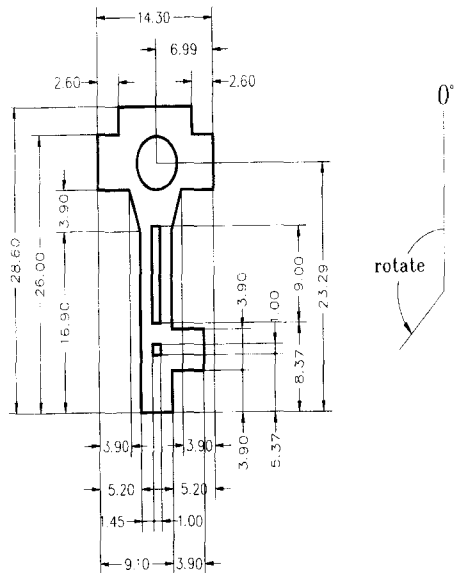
Drawing of a sample blank(2) with blanking and piercing processes
